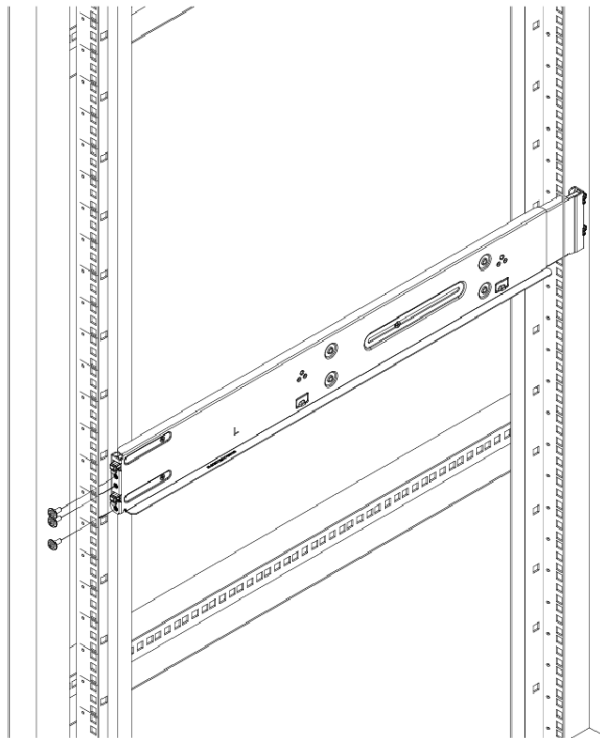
Attaching the Rail Front to the Rack (Left Rail Assembly Shown)
